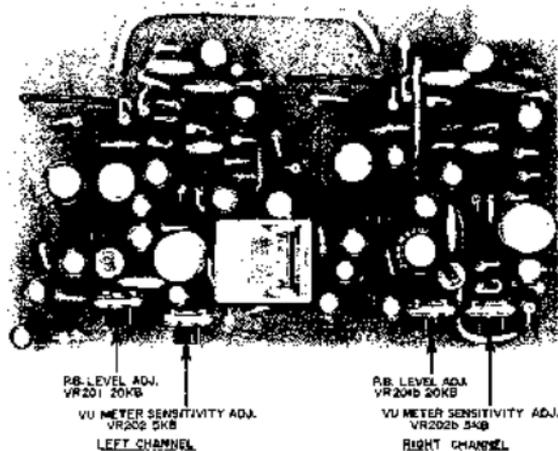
P.B. AMP. P.C. BOARD (Face Side)
